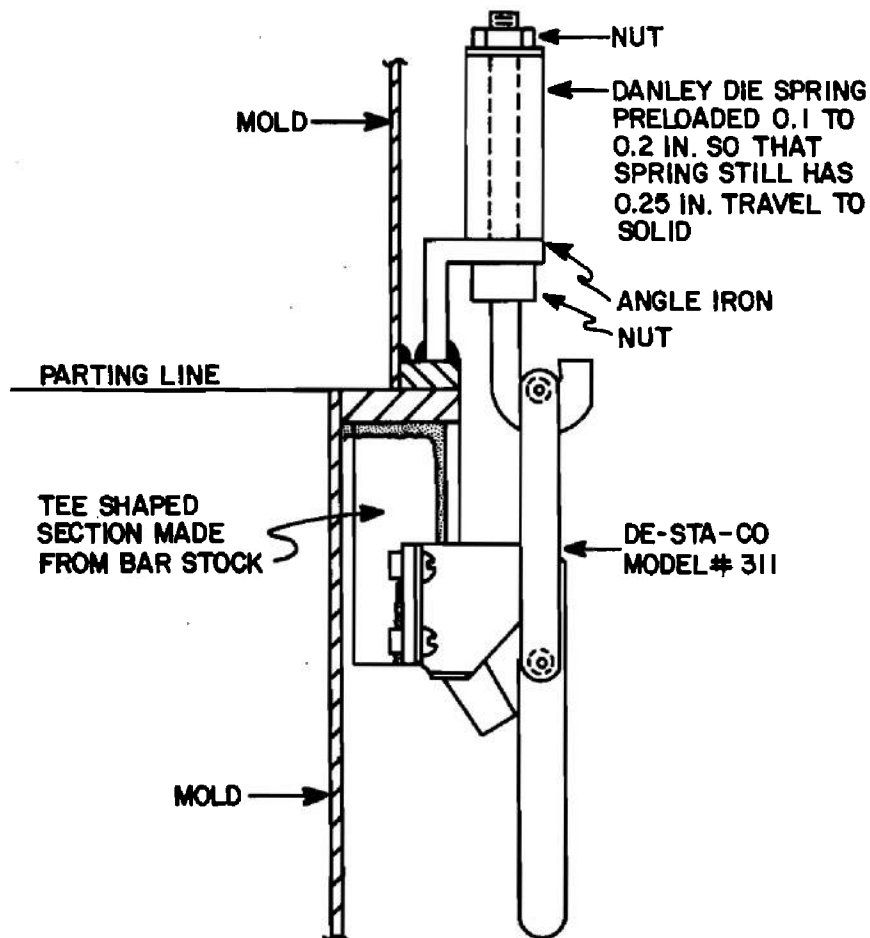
Spring Loaded Parting Line for Fabricated Steel Mold<sup>6</sup>
